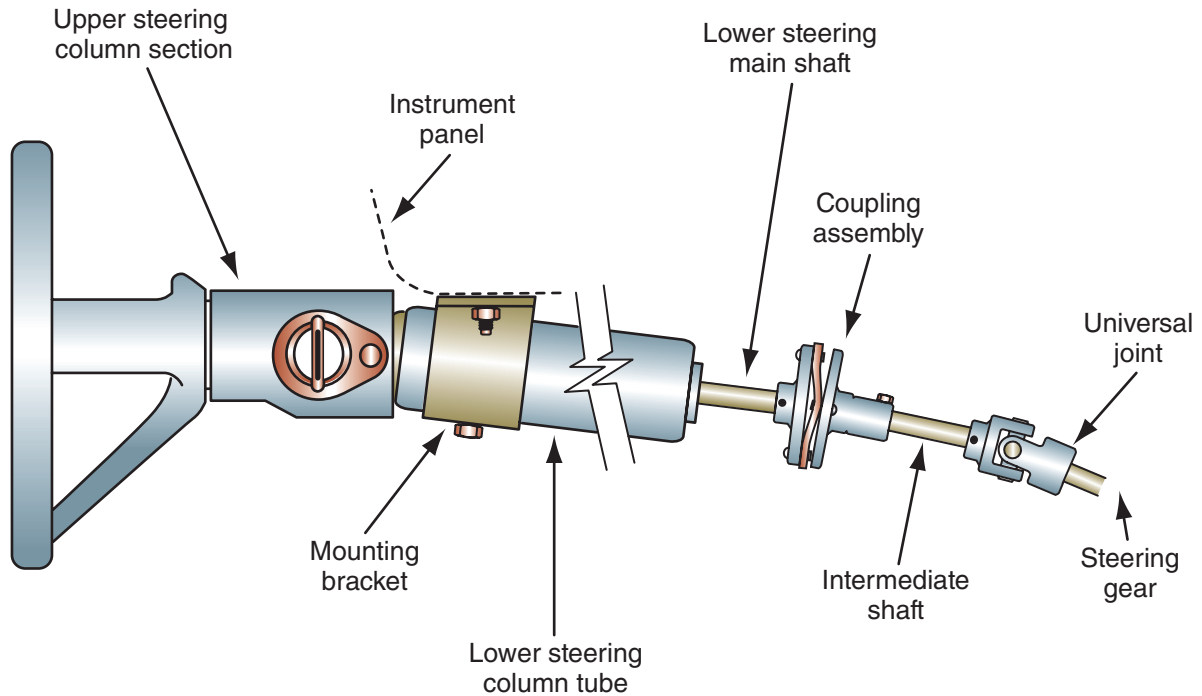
Typical steering column components. The steering wheel is splined to the shaft that extends through the column and down to the steering gearbox.
